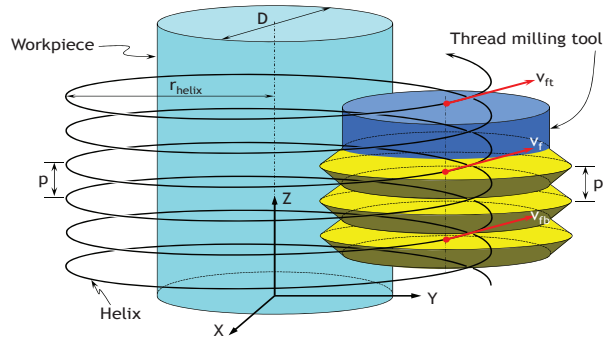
Relative positioning of thread milling tool to workpiece at thread milling.
